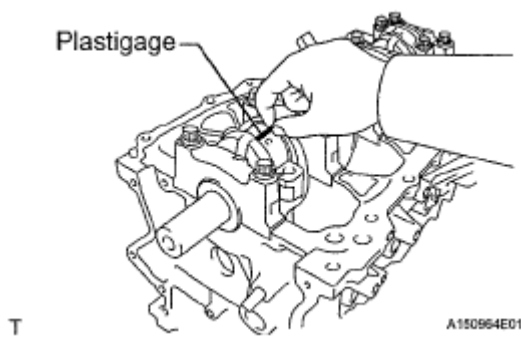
Laying Strip Of Plastigage On Crank Pin
